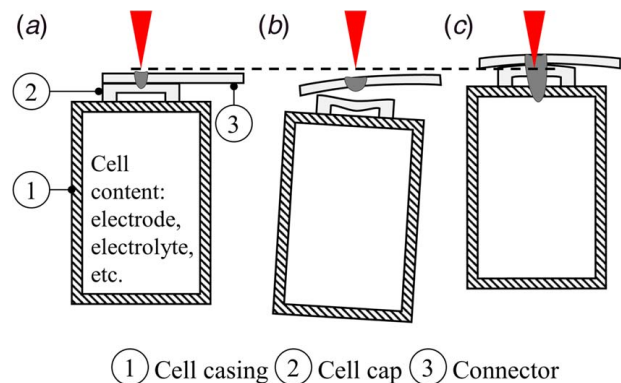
Typical design of a cylindrical cell and tab connector; (a) ideal welding condition, (b) actual welding condition, and (c) over-penetration
